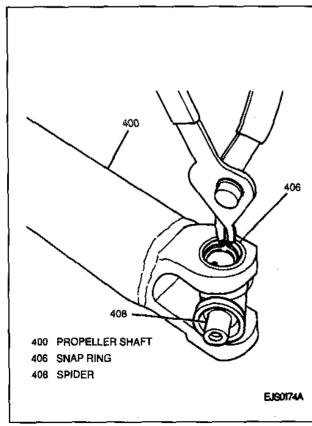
Removing Propeller Shaft Yoke Snap Ring
